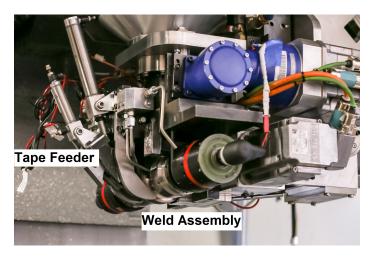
UAM SETUP. ALUMINUM TAPE IS FED TO THE ULTRASONIC WELDER WHICH BUILDS STRUCTURES ON THE BASEPLATE.
